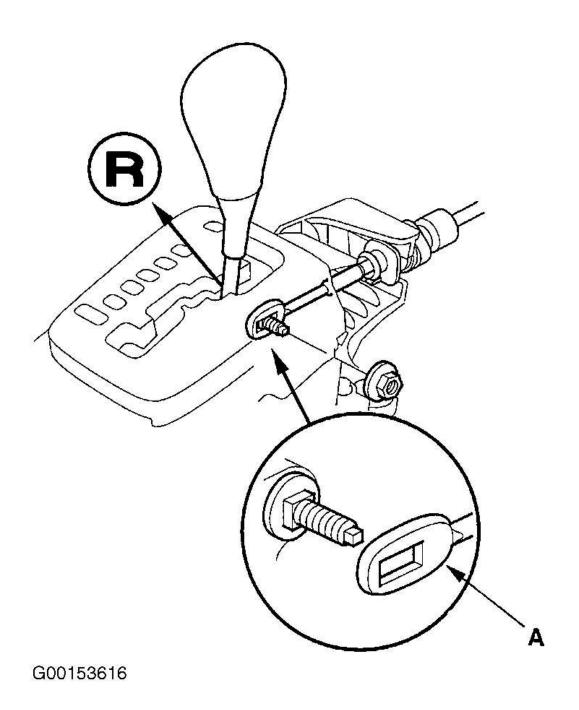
Removing/Installing Shift Cable From Gearshift Lever Assembly Courtesy of AMERICAN HONDA MOTOR CO., INC.
